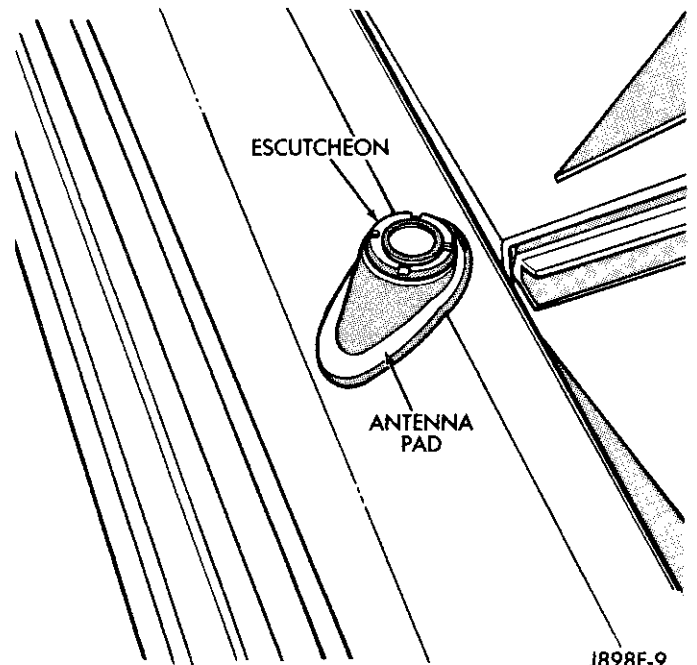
Remove/Install Escutcheon and Antenna Pad
